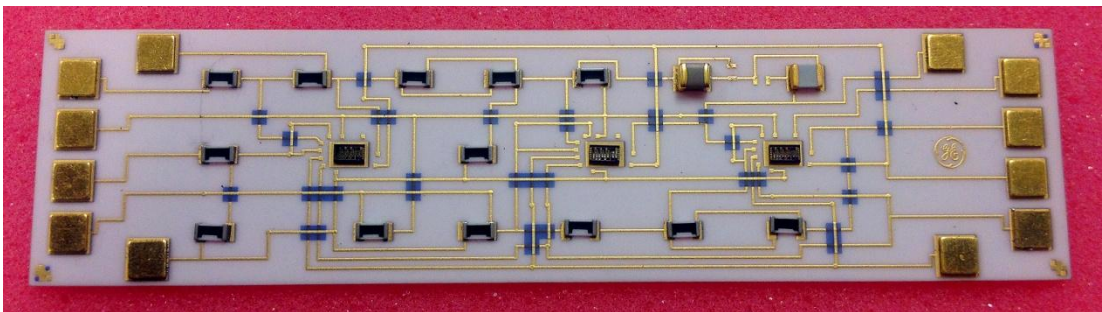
Assembled Test Board (Before Wire Bonding)
